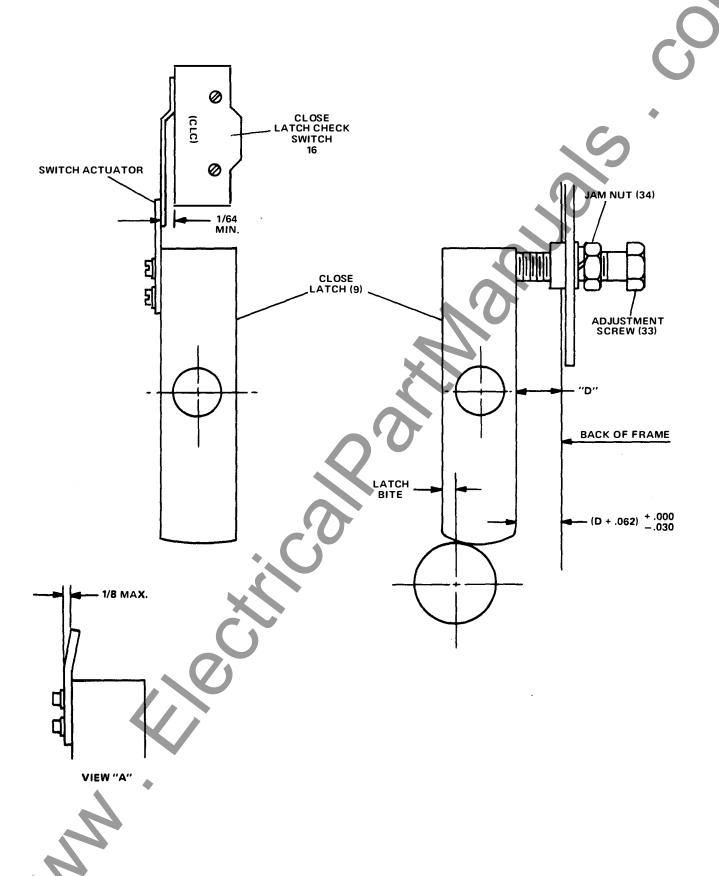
Close Latch Bite and Check Switch Adjustments
